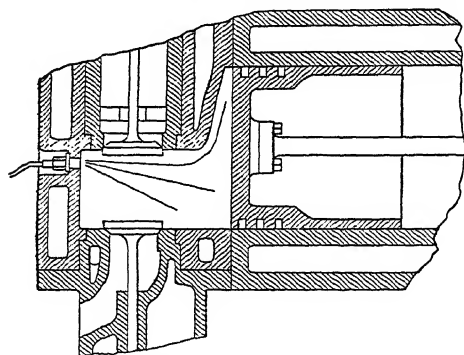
Attenuated Combustion Space of Horizontal Engine with Vertical Valves
